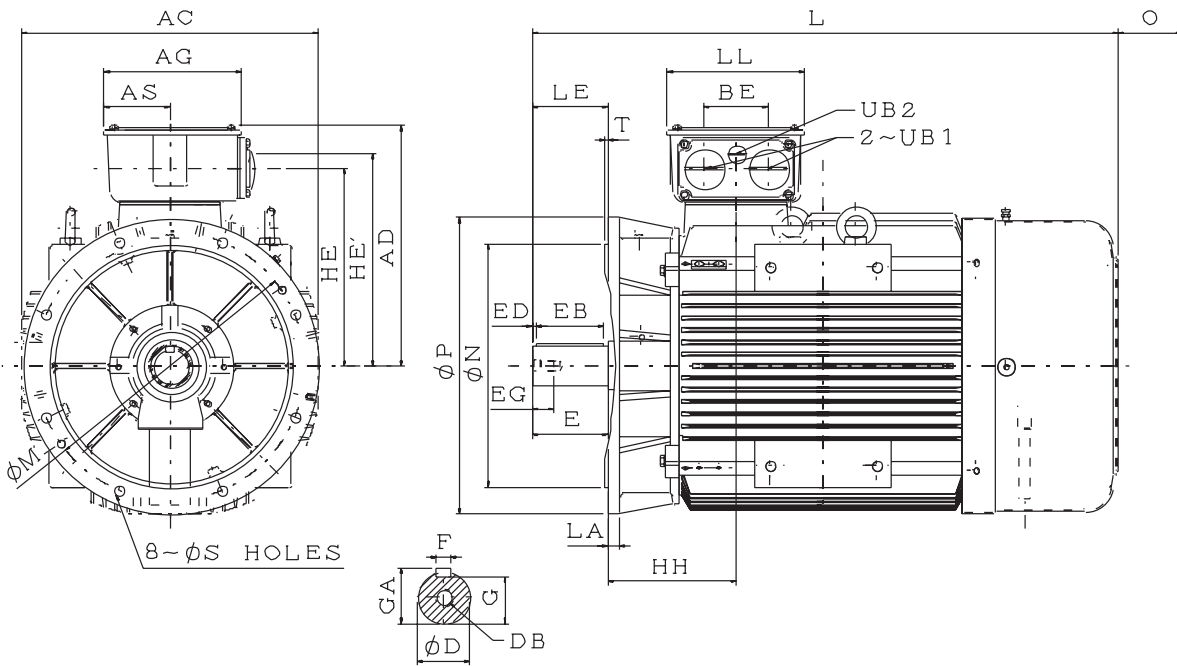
Outline drawing of cast iron design, feet version, mounting B5; frame size 280SA - 280MC
